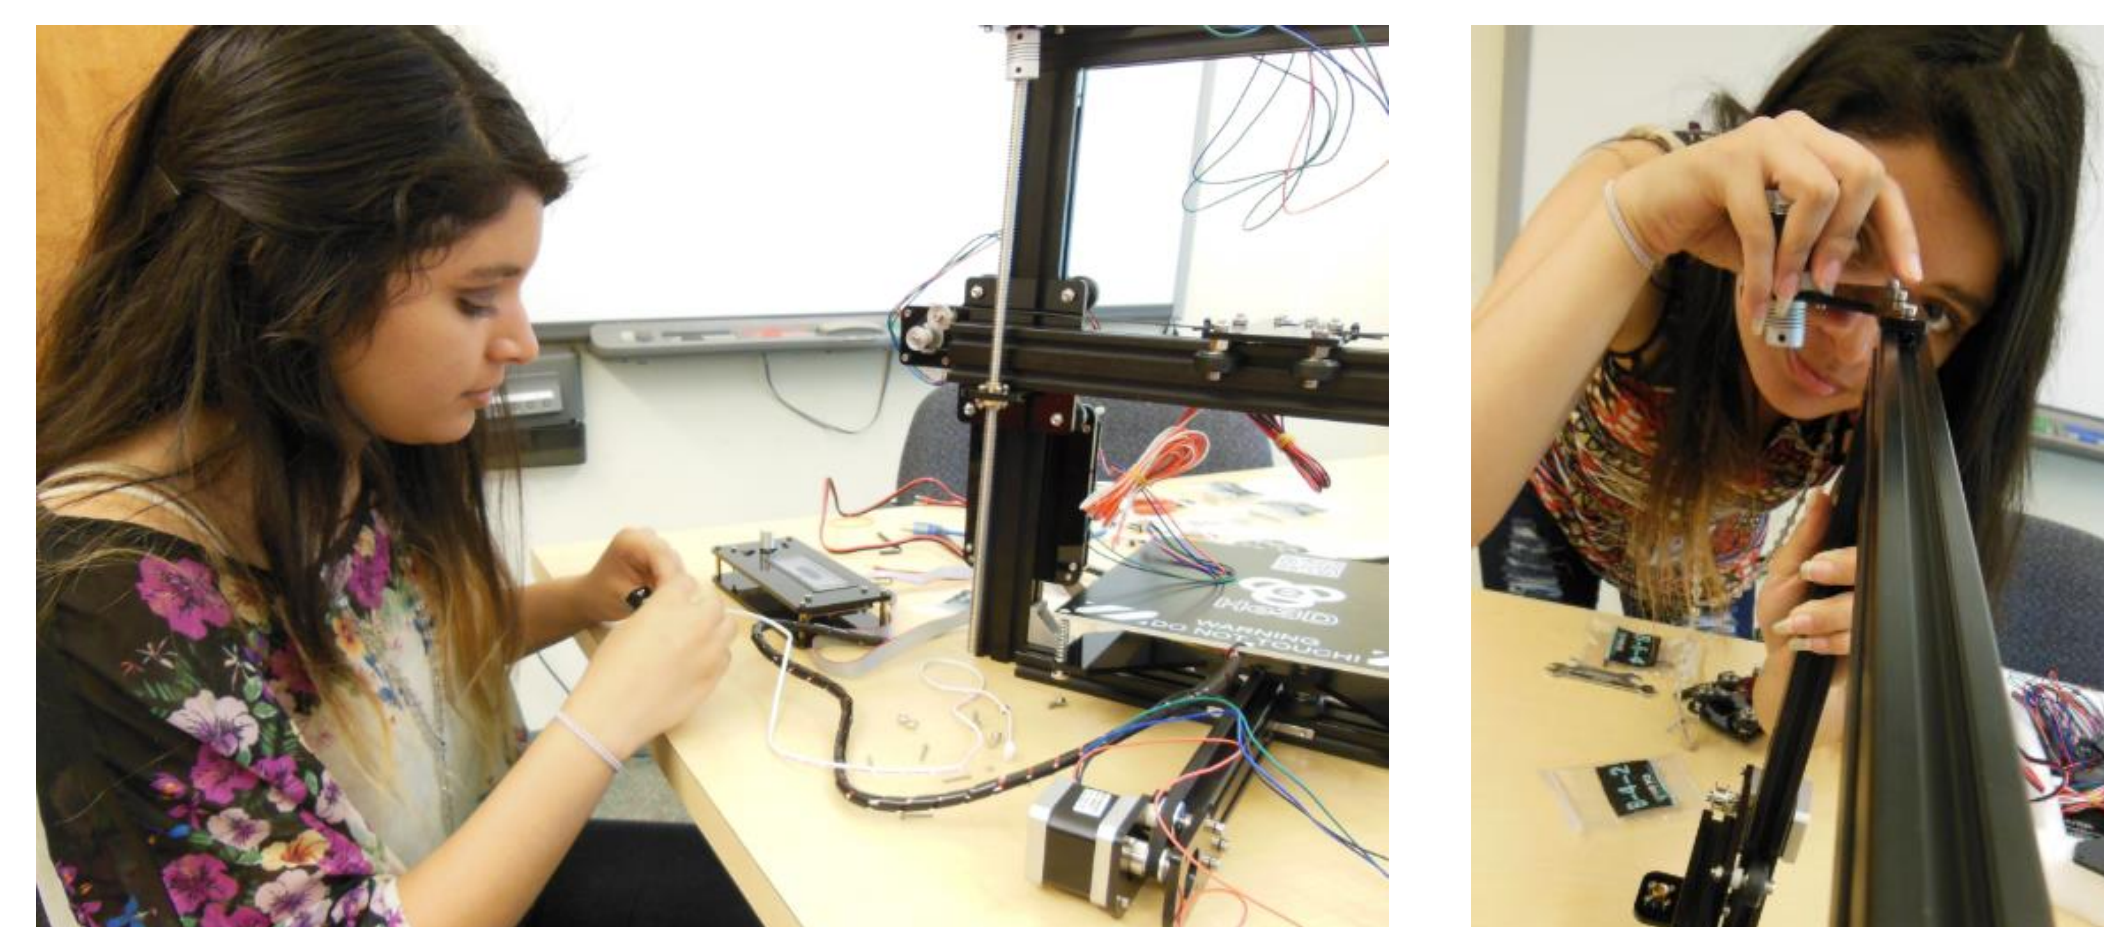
Assembly tasks: (Left) Connecting the y-axis limit switch; (right) Aligning the z-axis motor support t-nuts.
